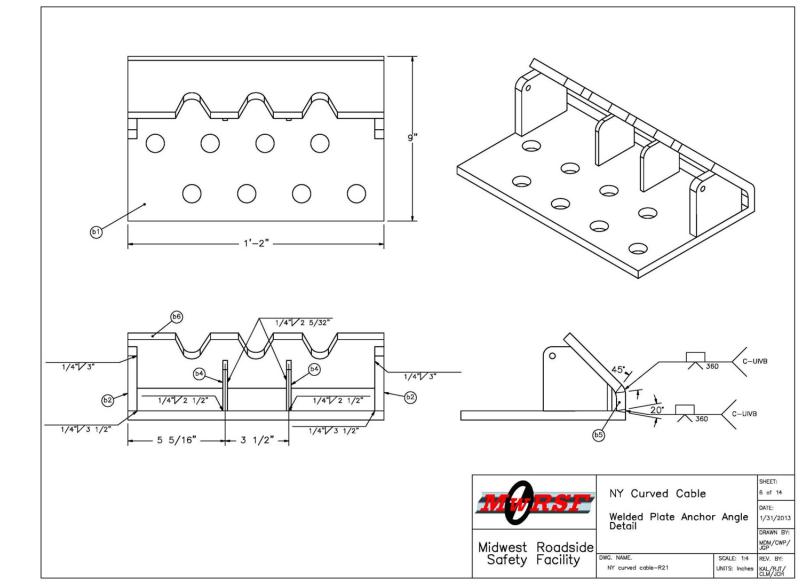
Cable Anchor Bracket Details, Test No. NYCC-1
